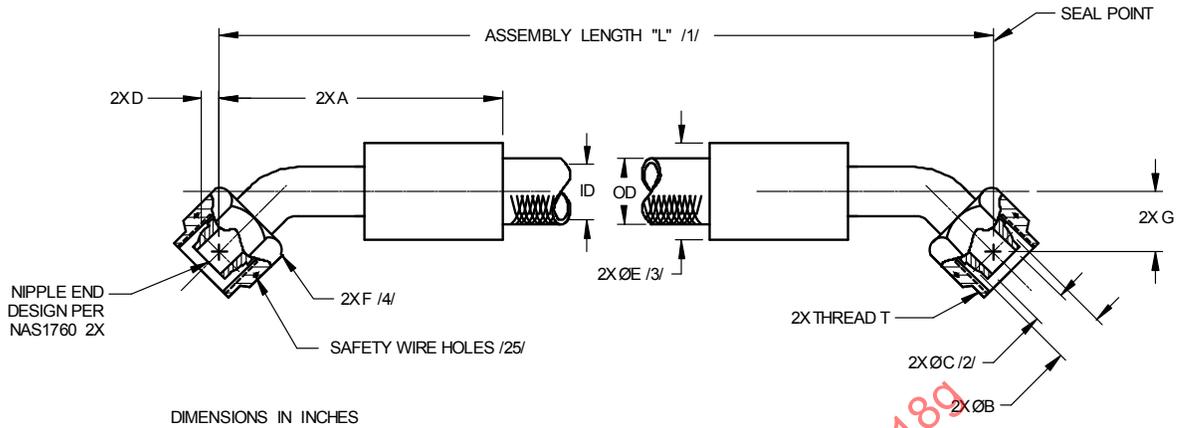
HOSE AND FITTING DIMENSIONS
